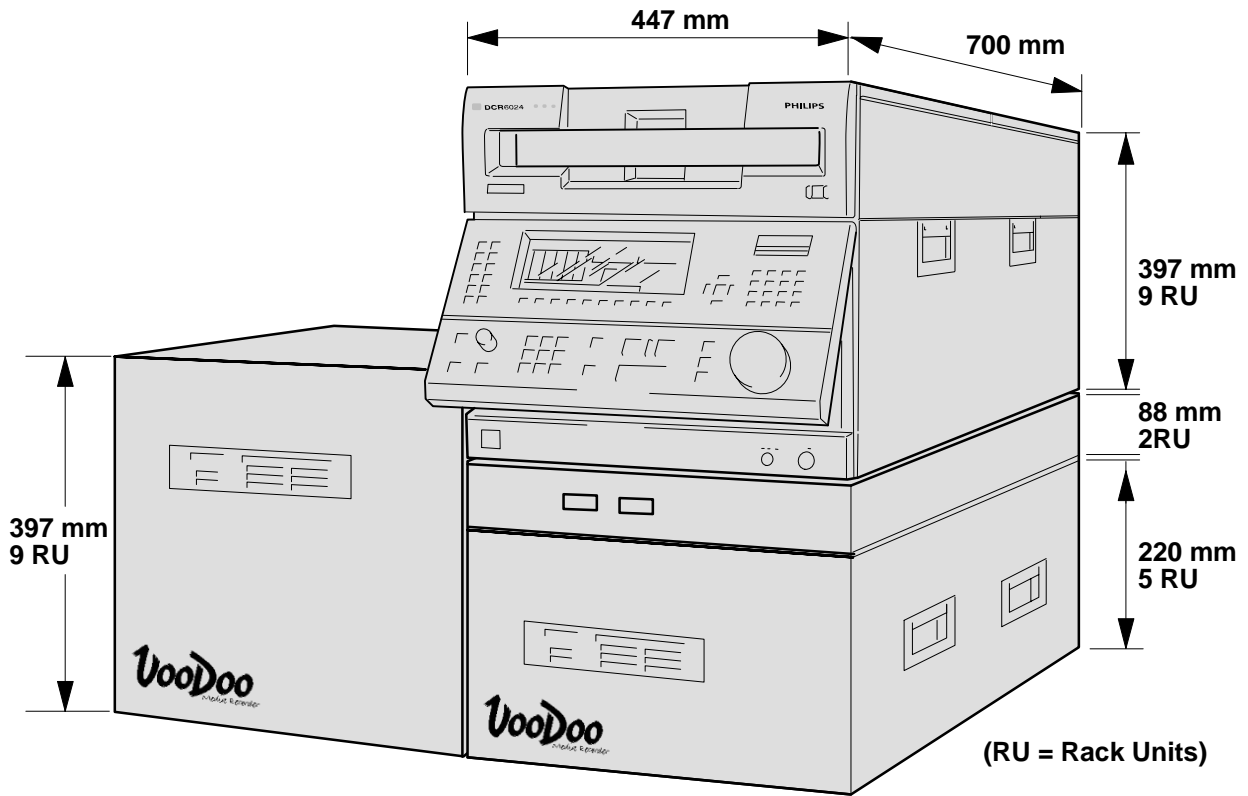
DCR 6000 dimensions (without required air inputs for a 19 inch cabinet mounting)
